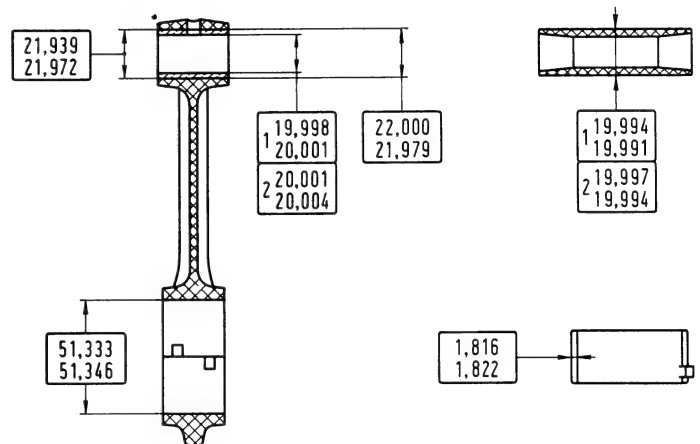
Critical dimensions (in mm) of 118 B.000 engine connecting rods, piston pins and small end bushings.
